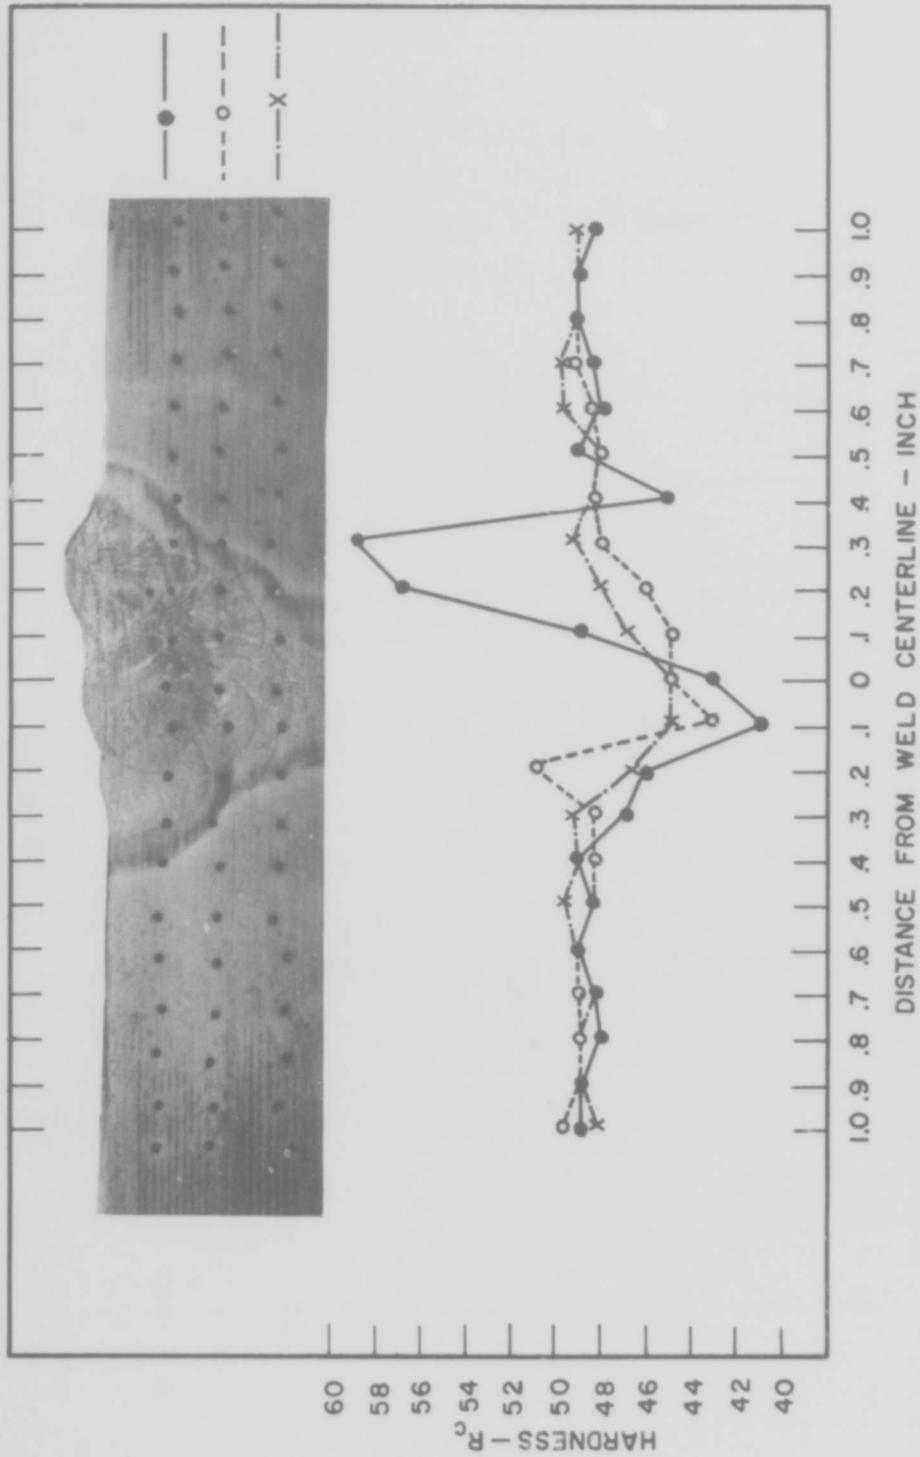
Hardness Survey of MIG Weld No. S301 Made in D6AC Plate.
